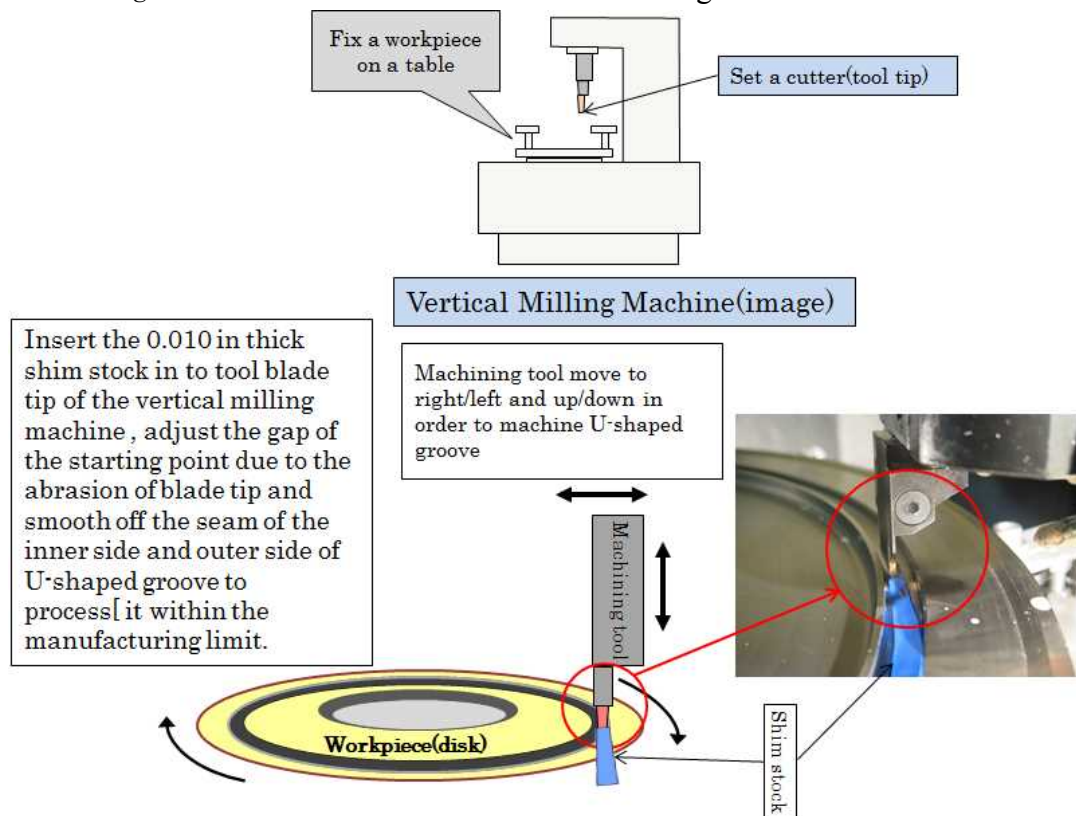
Processing the HPT Disk with use of a vertical milling machine
